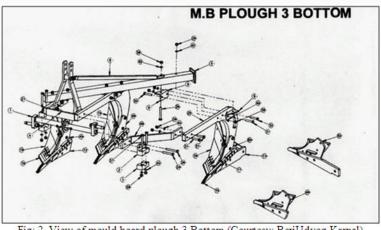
View of mould board plough 3 Bottom (Courtesy: BeriUdyog,Kamal)
